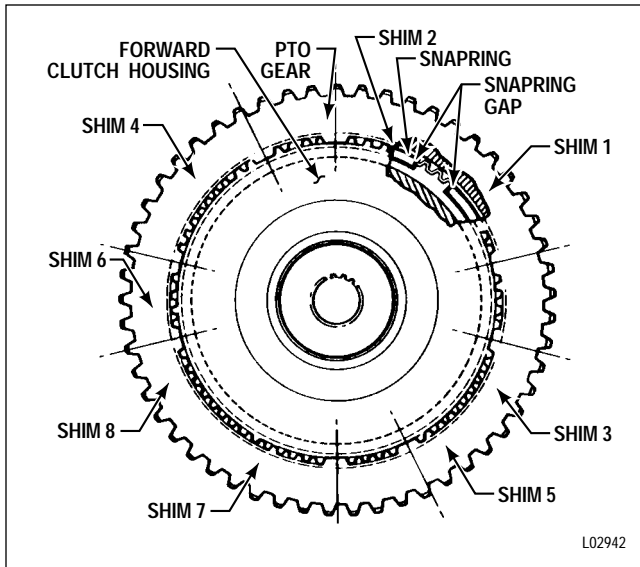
Removing PTO Gear From Forward Clutch Housing (Later Models Without Retarder)
